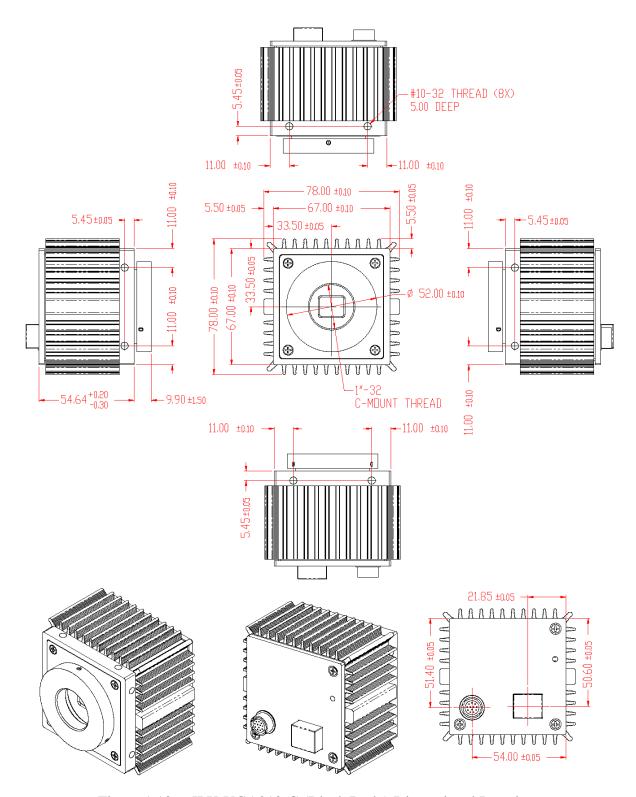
IPX-VGA210-G (Black Body) Dimensional Drawings
